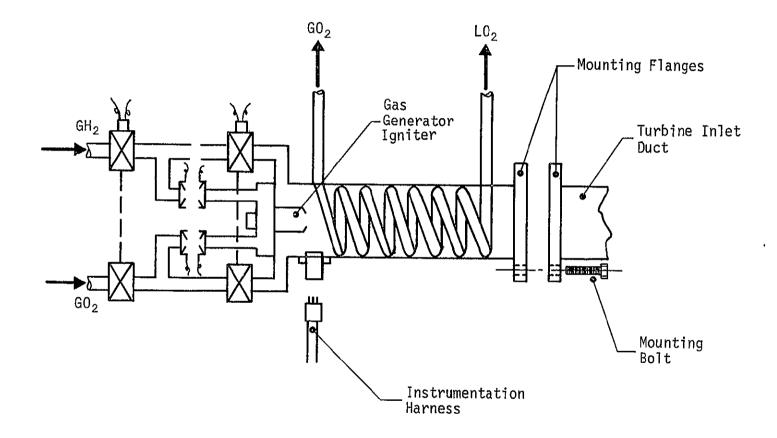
Booster Gas Generator/Heat Exchanger Package Removal and Replacement
